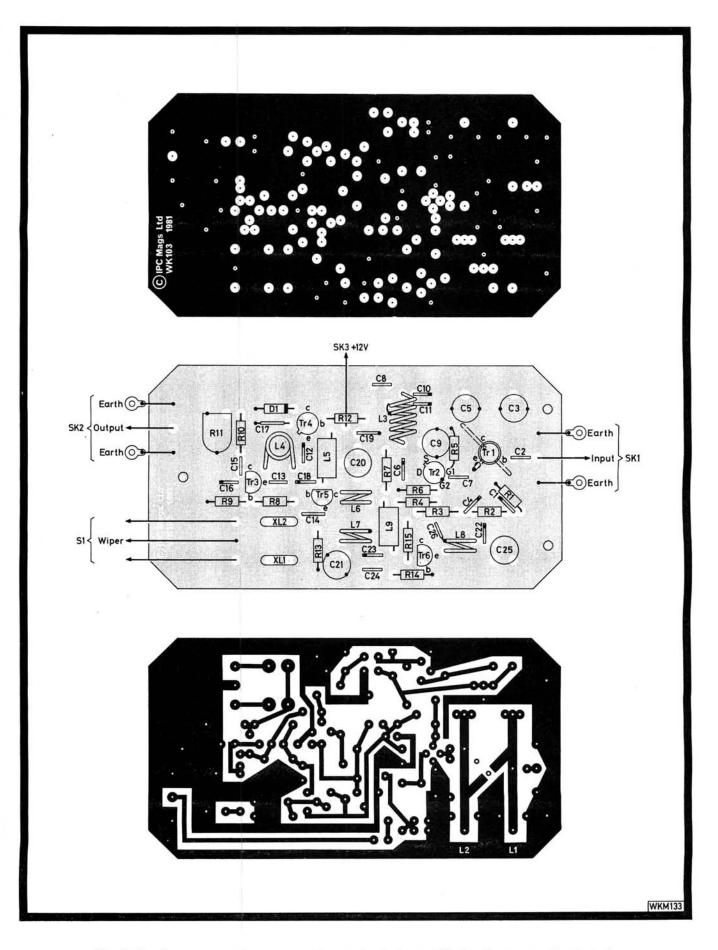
Track patterns and component layout, both shown full size. Component leads to be soldered on both sides of the p.c.b. are indicated by dots on the component layout drawing
